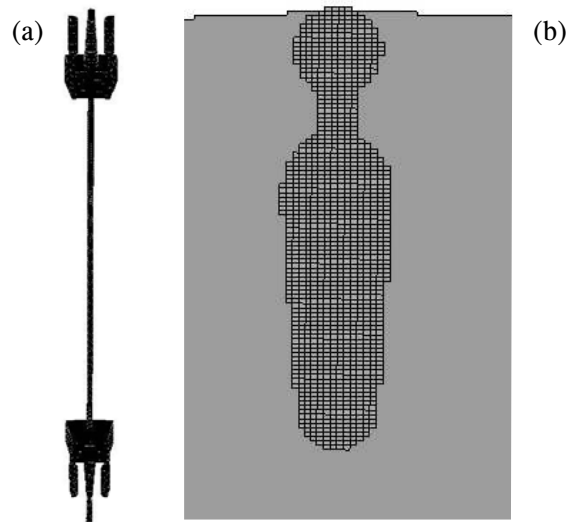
Numerical analysis model (a) casting (b) section of slot
